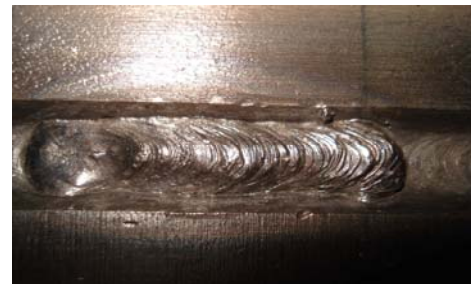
Photograph of the cracked welded plate (Specimen A1).
